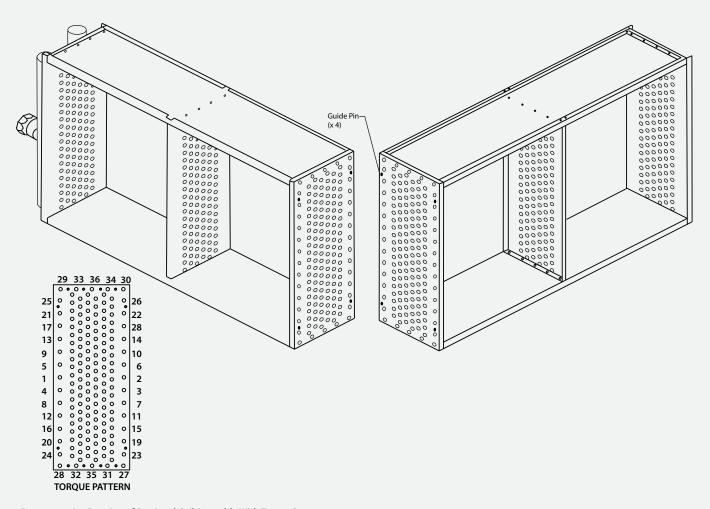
Representative Drawing of Sectional Coil Assembly With Torque Pattern
